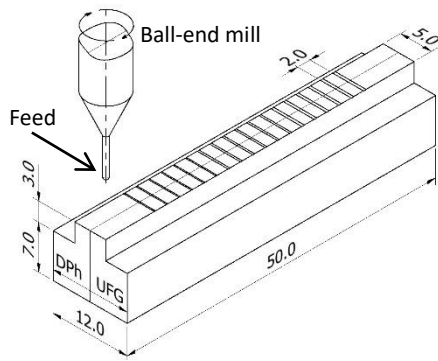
3D view of the workpiece and ball-end mill (in mm).
